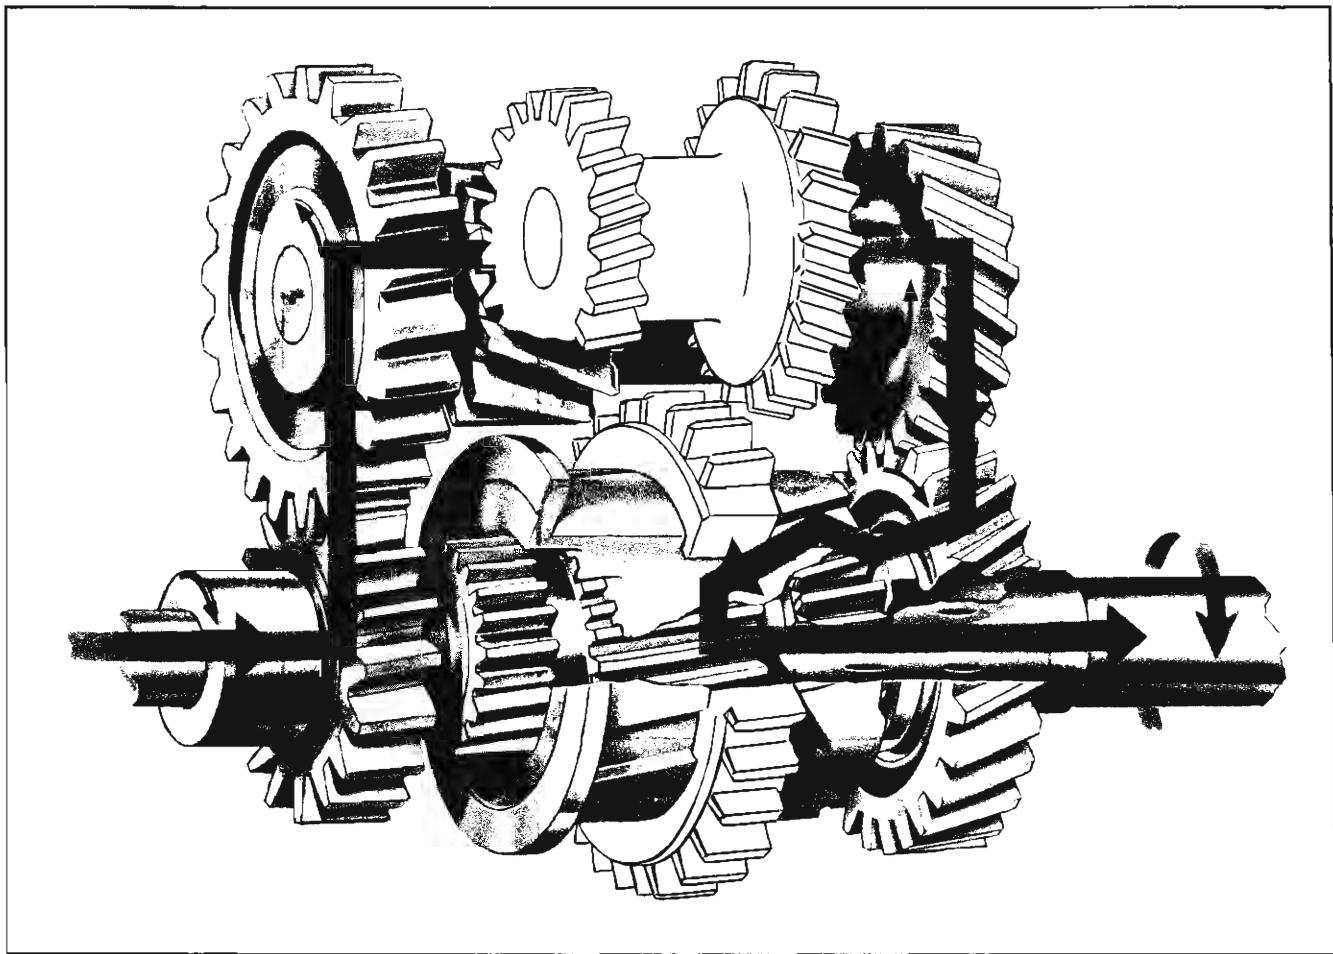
Power Flow with Transmission Gears in Second Gear Position
